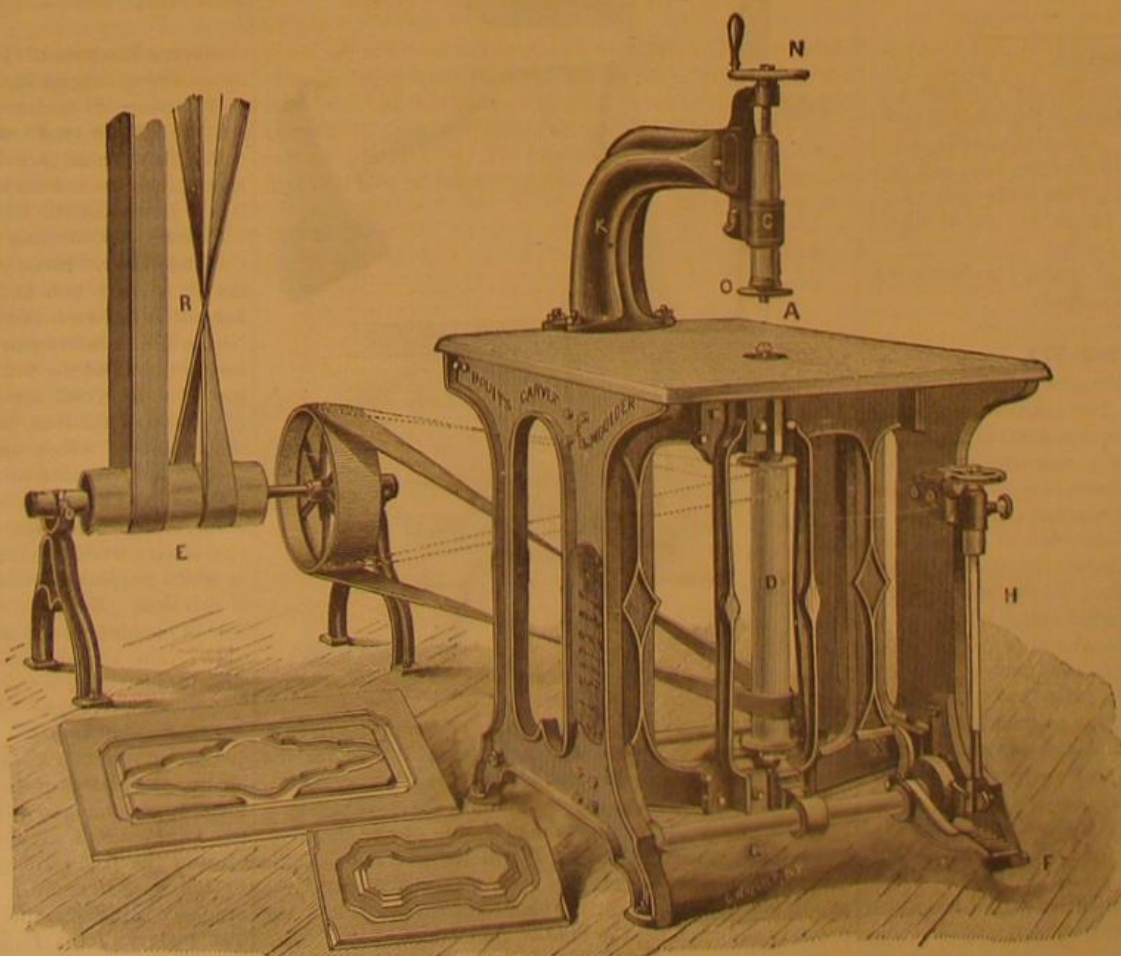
BOULT'S MOULDING, CARVING, AND PANELING MACHINE.
